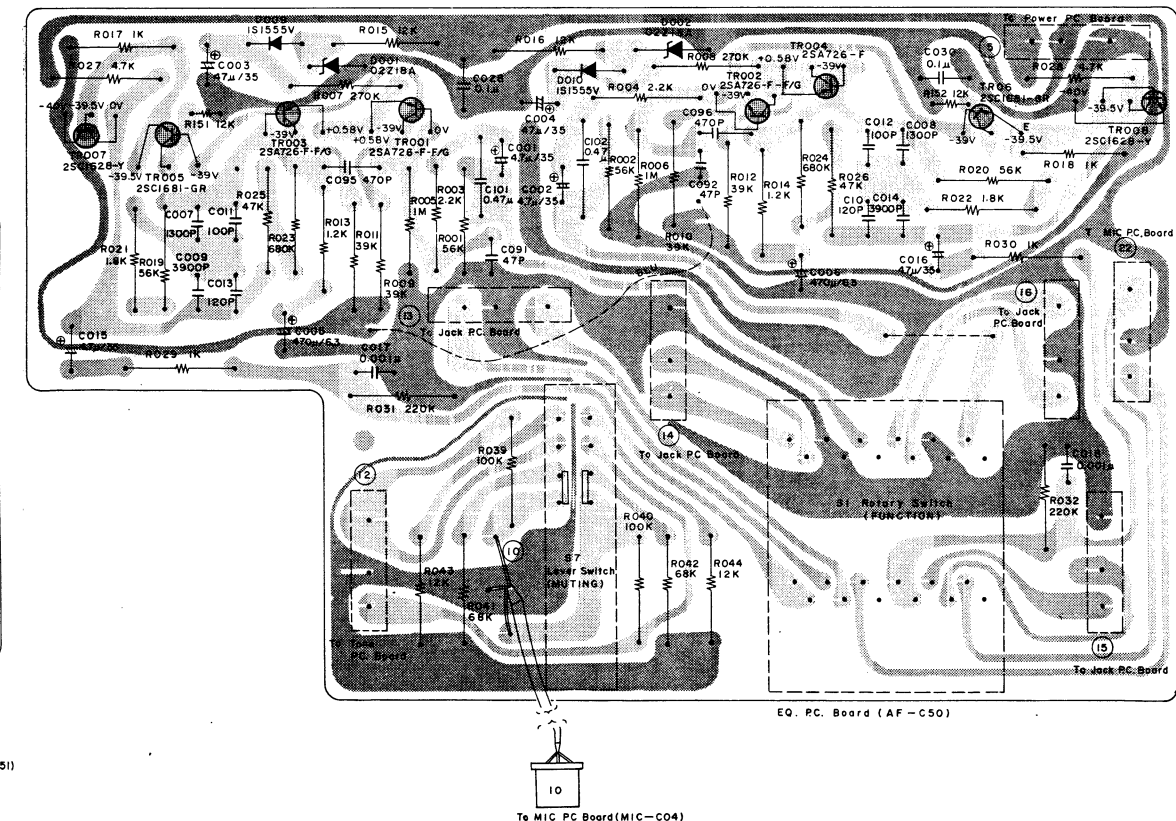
Bottom View of EQ. Amp. P.C. Board (CCT-AF-C50).
